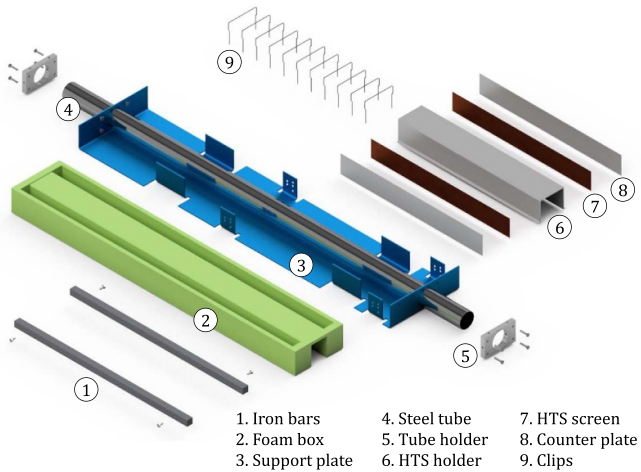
Exploded view of the parts of the experimental assembly. (1) Iron bars, (2) polyimide foam box, (3) aluminum support plate, (4) stainless steel tube, (5) aluminum collars, (6) aluminum HTS holder, (7) HTS screens, (8) aluminum counter plates, (9) stainless steel clips.
